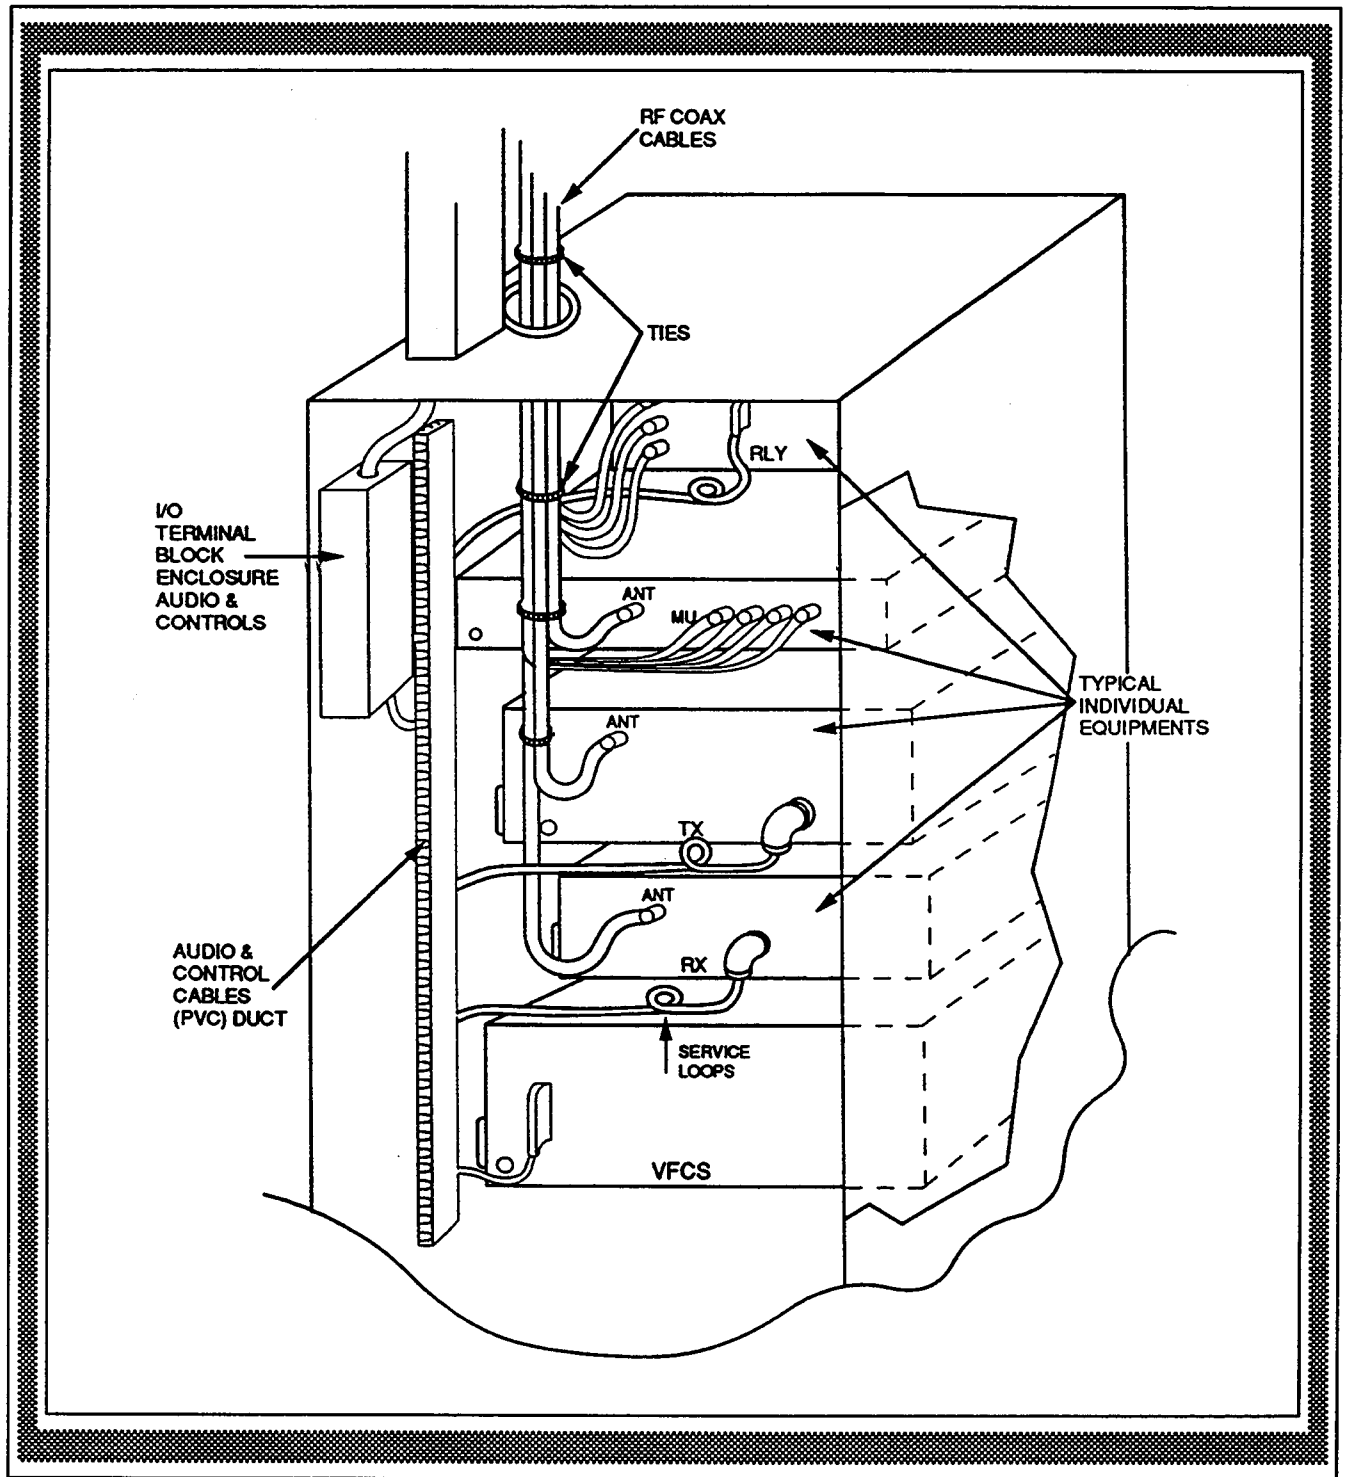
TYPICAL EQUIPMENT RACK WIRING
